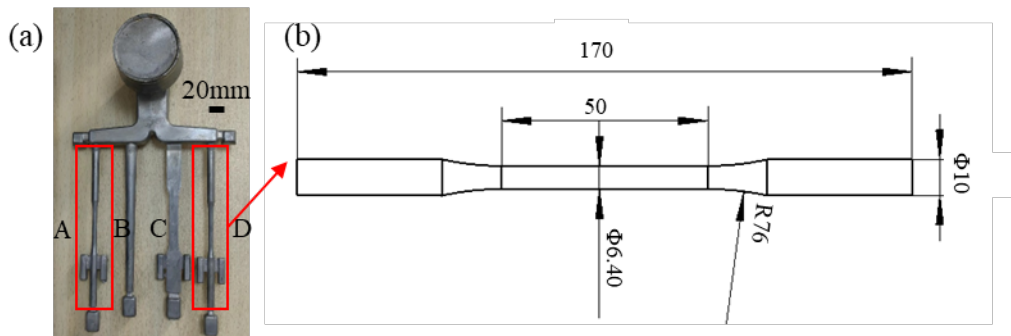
(a) Die casting component and (b) sample size for tensile testing.
